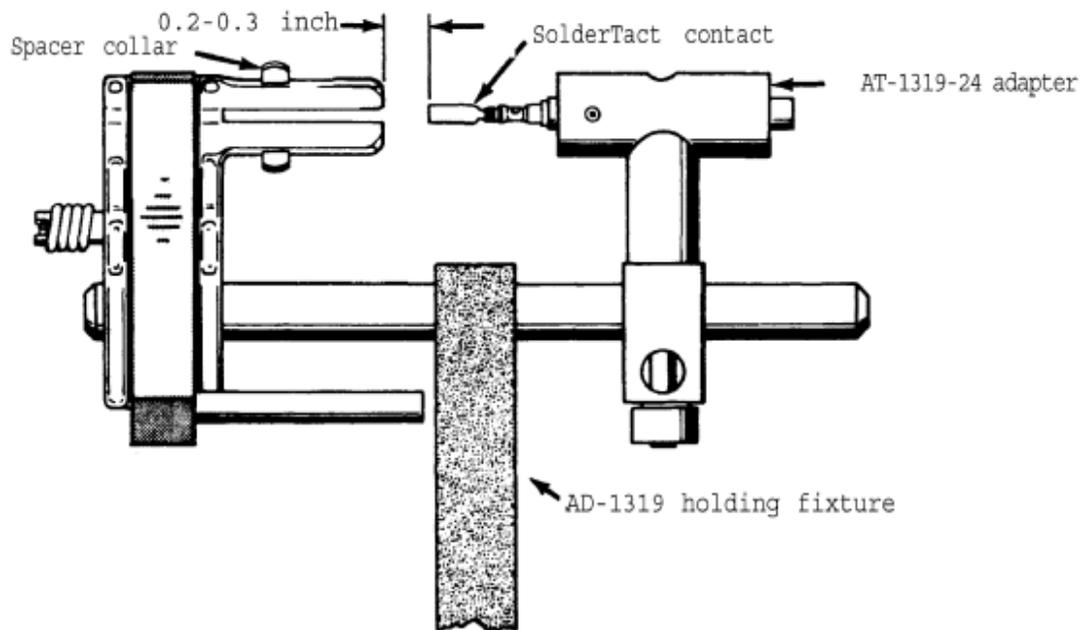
Setup Dimensions for AD-1319 Holding Fixture
